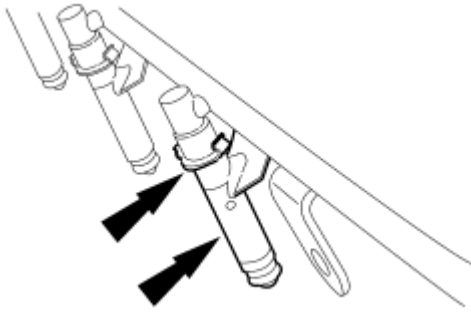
Locating Fuel Rail, Fuel Injectors And Fuel Charging Harness
